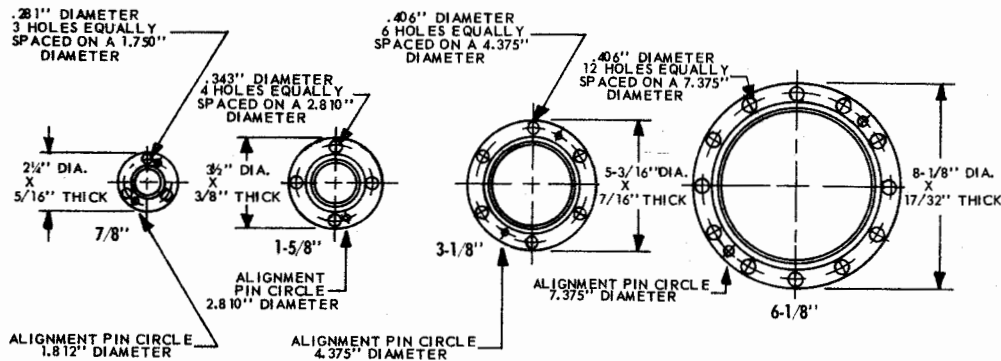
Flange Dimensions for Rigid Coaxial Transmission Line
